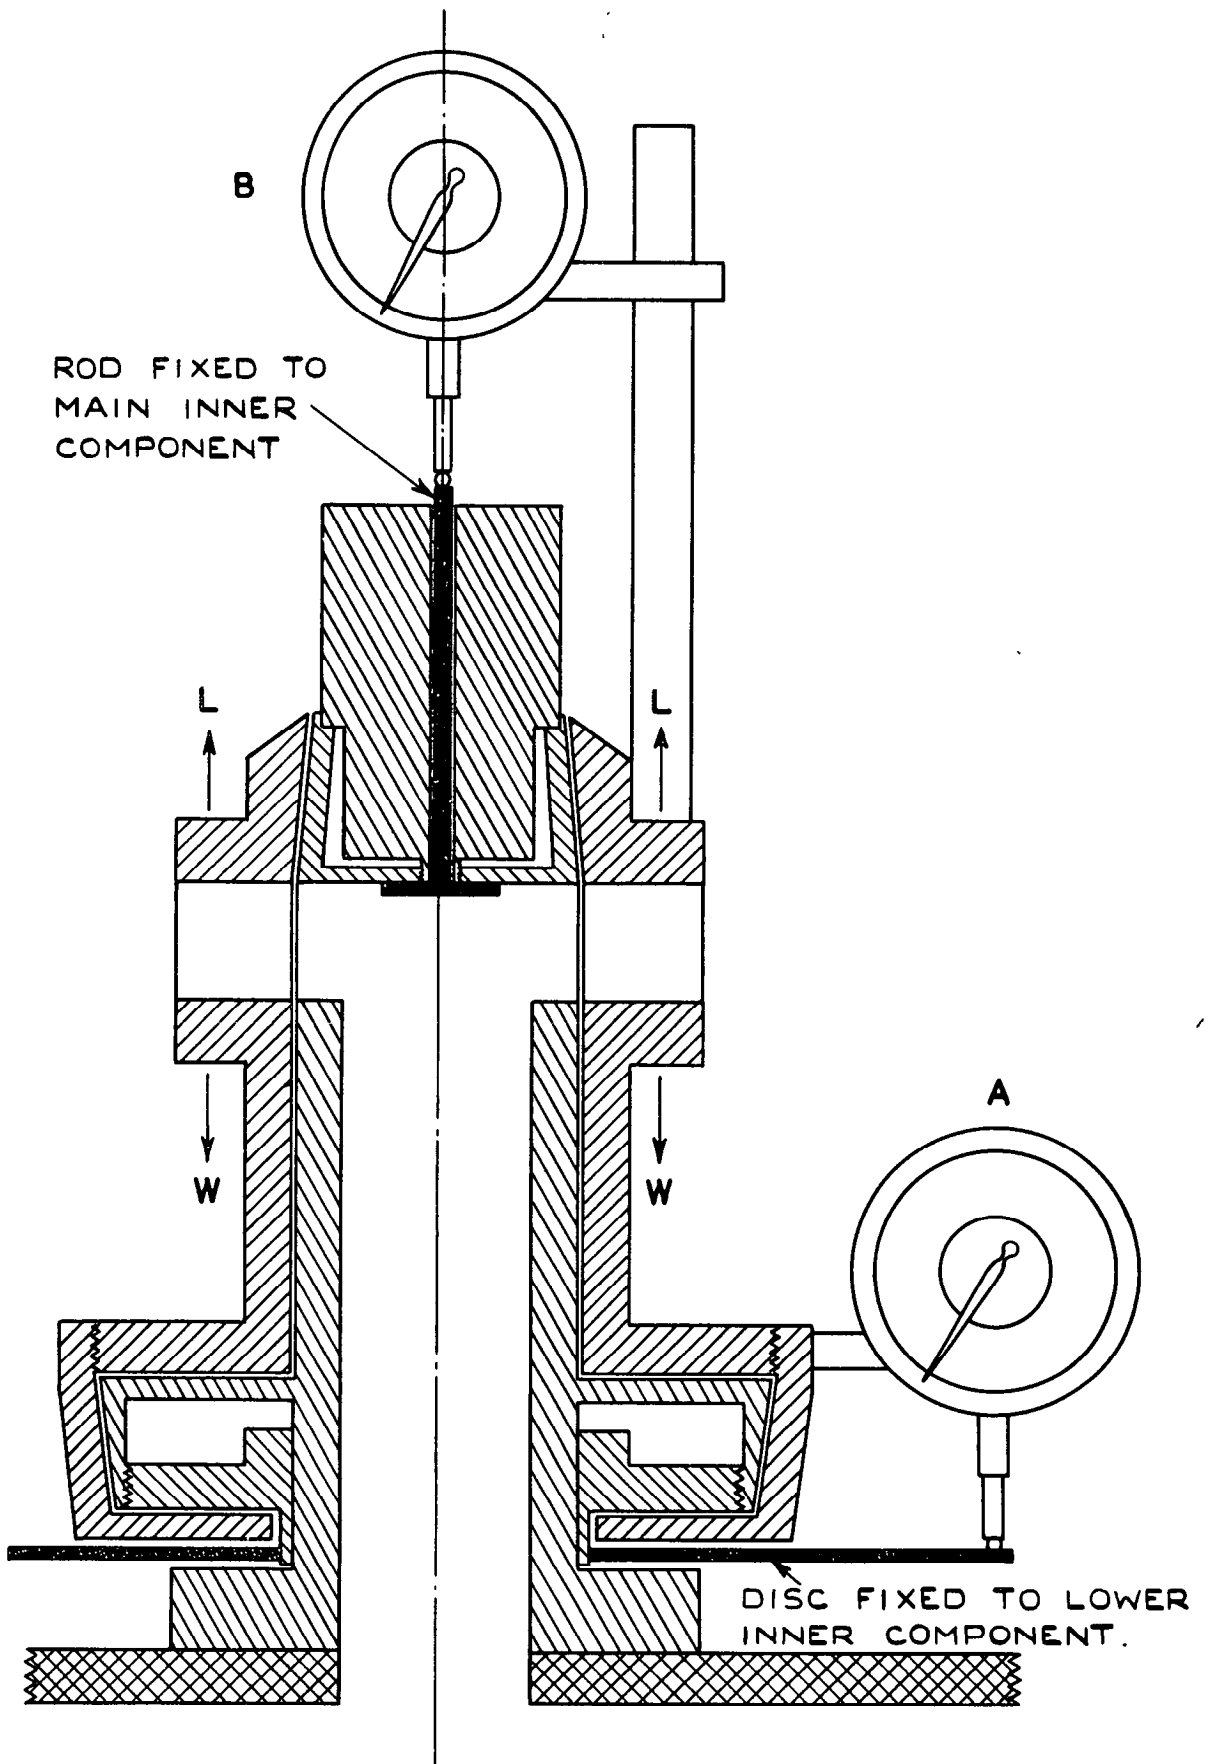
METHOD OF GAP MEASUREMENT FOR HORIZONTAL BEARINGS.
